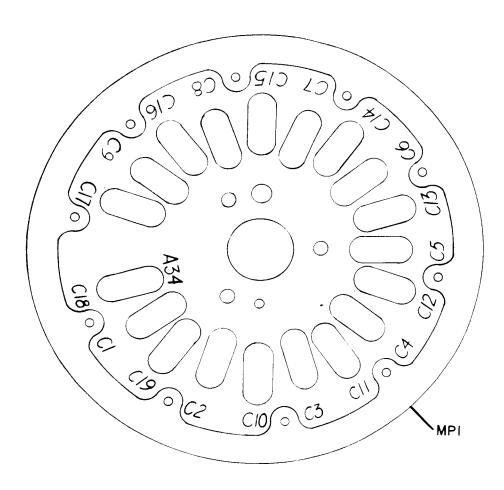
100 kHz Rotor Subassembly A2A4A34, Component Locations
